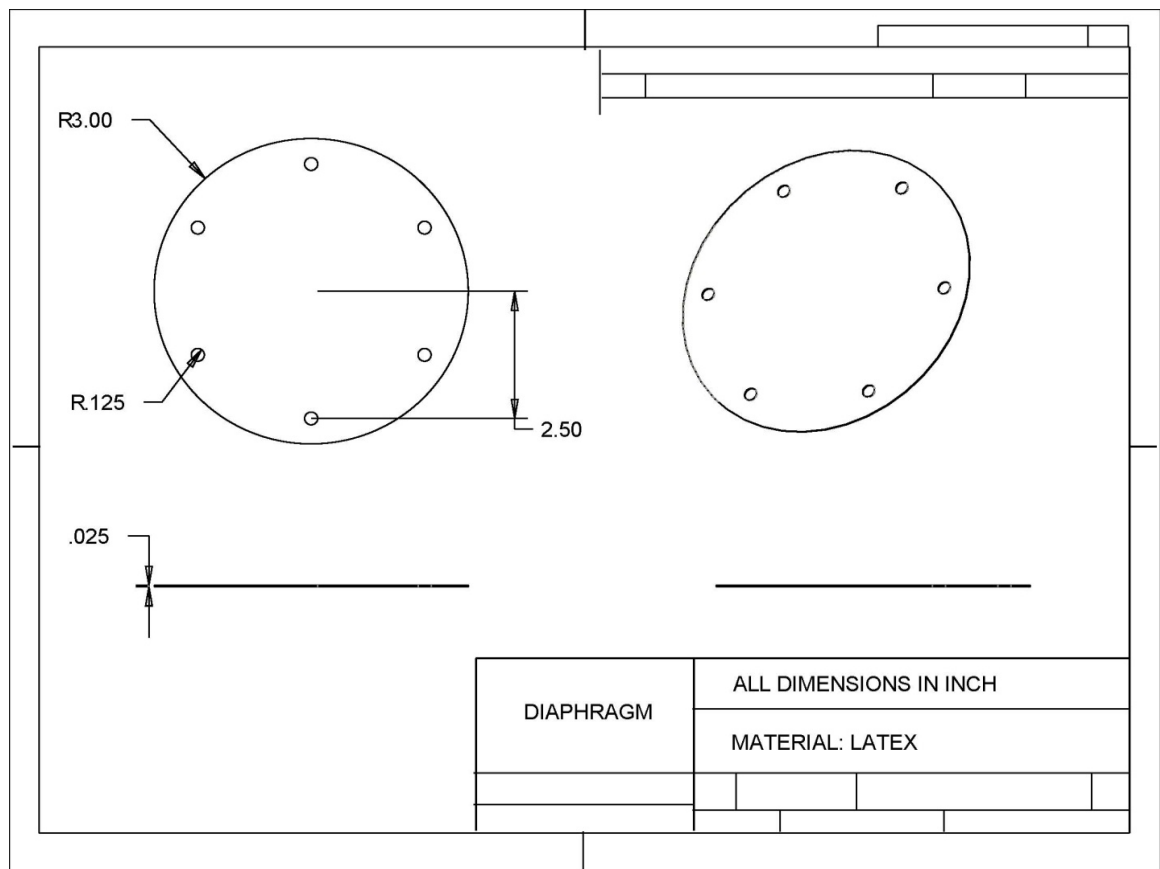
2D CAD model of diaphragm with dimensions and top, front, right hand and isometric views.
